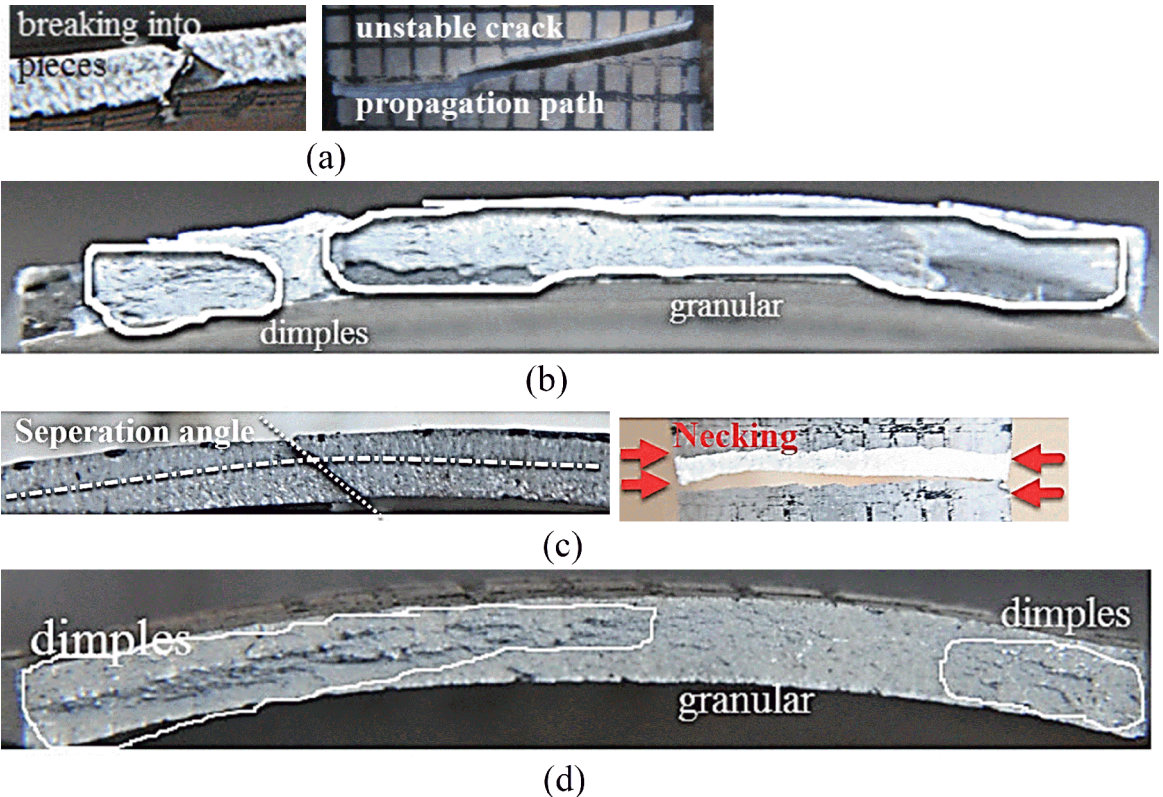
Photographs of fracture surfaces, a) Crack propagation path of AA7075-T6, side and front of sample, b) Cross section of ruptured surface of AA7075-T6, c) Crack propagation path of AA7075, dissolved at 500 °C, side and front of sample, d) Cross section of ruptured surface of AA7075, dissolved at 500 °C
